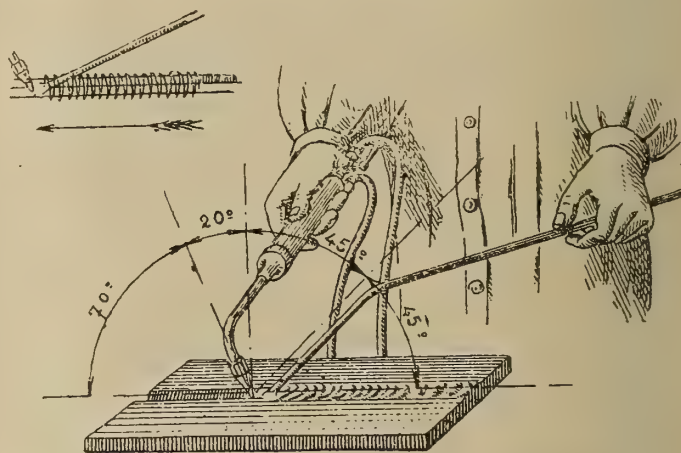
WELDING OF THIN SHEETS OF METAL
